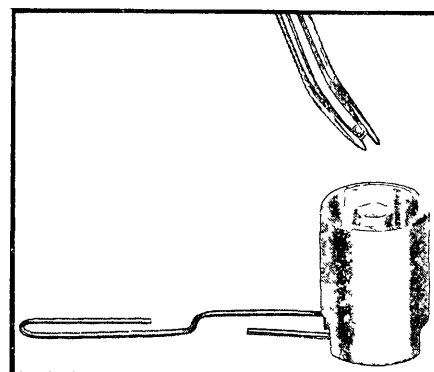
Installing adjuster balls in sleeve. Chrysler disc brake
